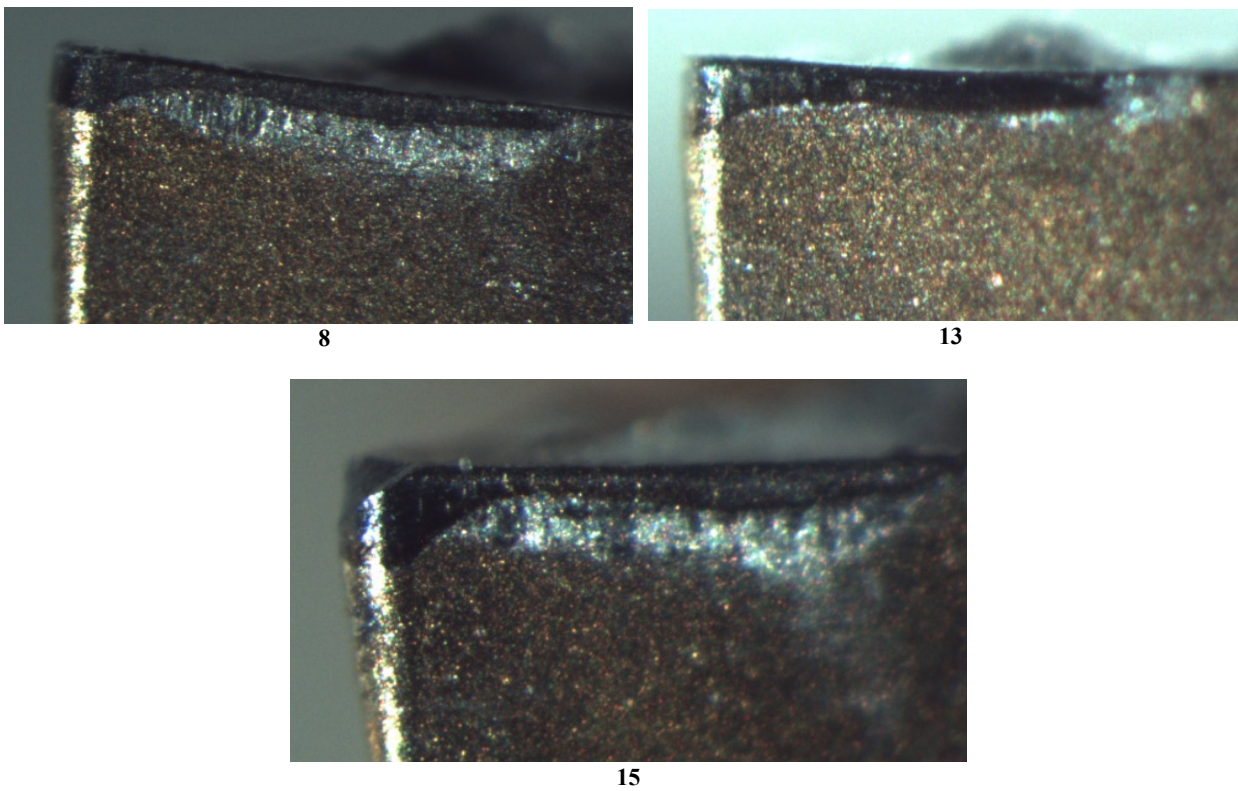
Cutting plates after machining of alloy samples with 0,15 % Ti (sample No. 8, 13, 15)
